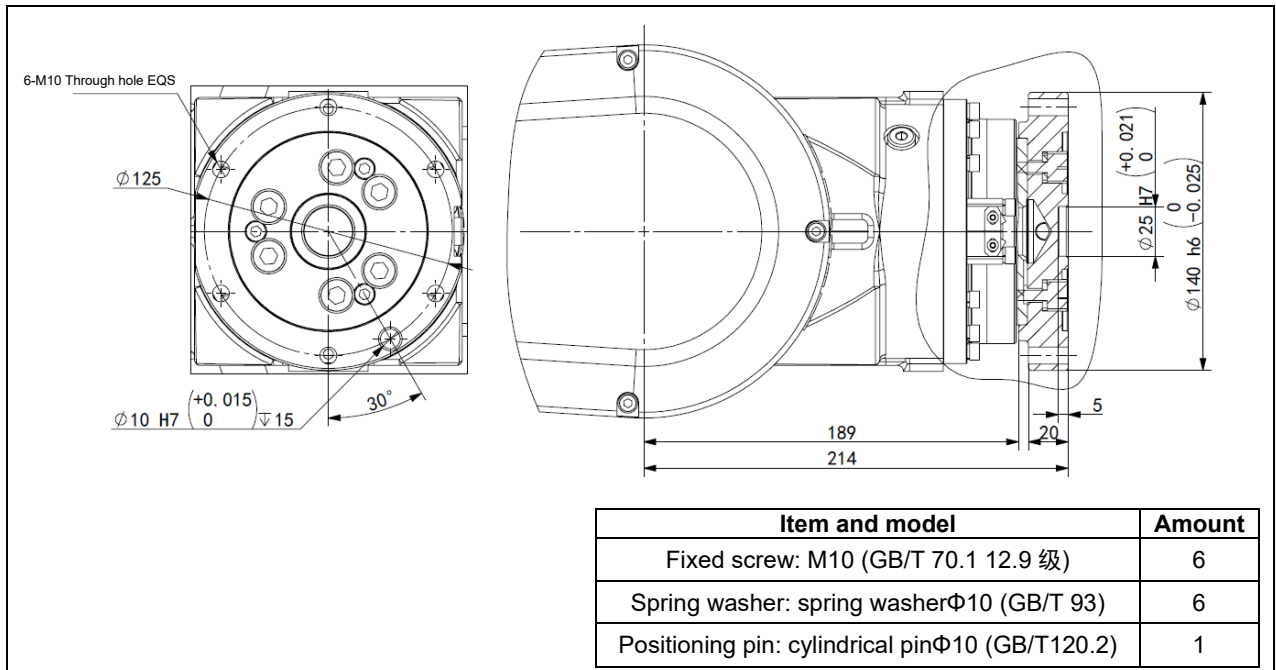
End flange mounting dimension (ER100B-3000, ER100B-3500-DW)
